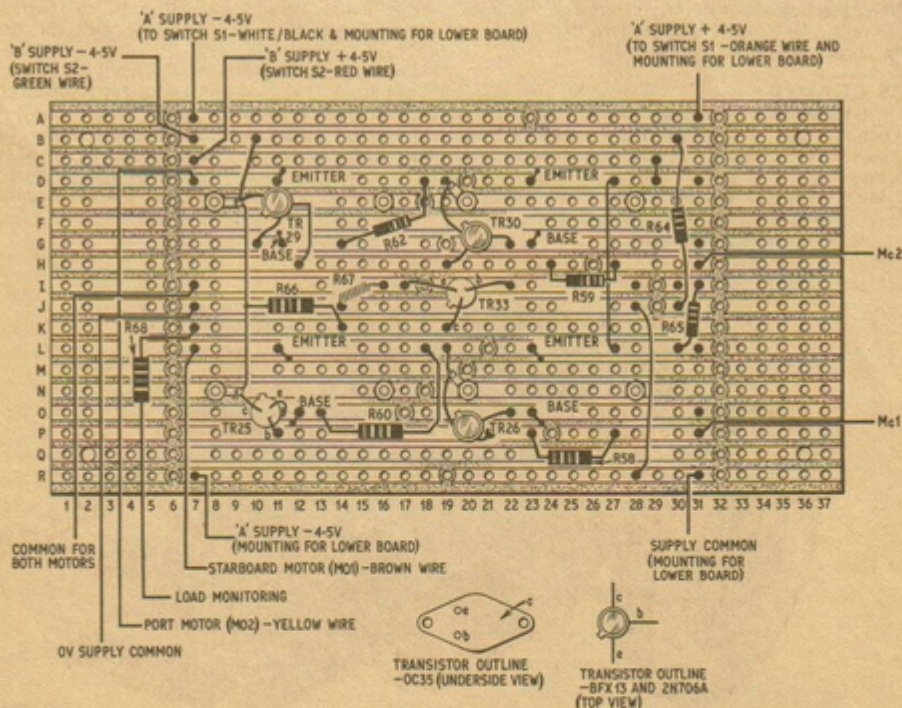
Underside view of the Veroboard showing component wiring and breaks in the circuit strips. Care should be taken that the emitter and base leads from the OC35's do not short with adjacent copper strips. All link wires should be of the plastic covered type. Transistors TR25 and TR33, which are mounted upside down, should be kept well clear of the copper strips
